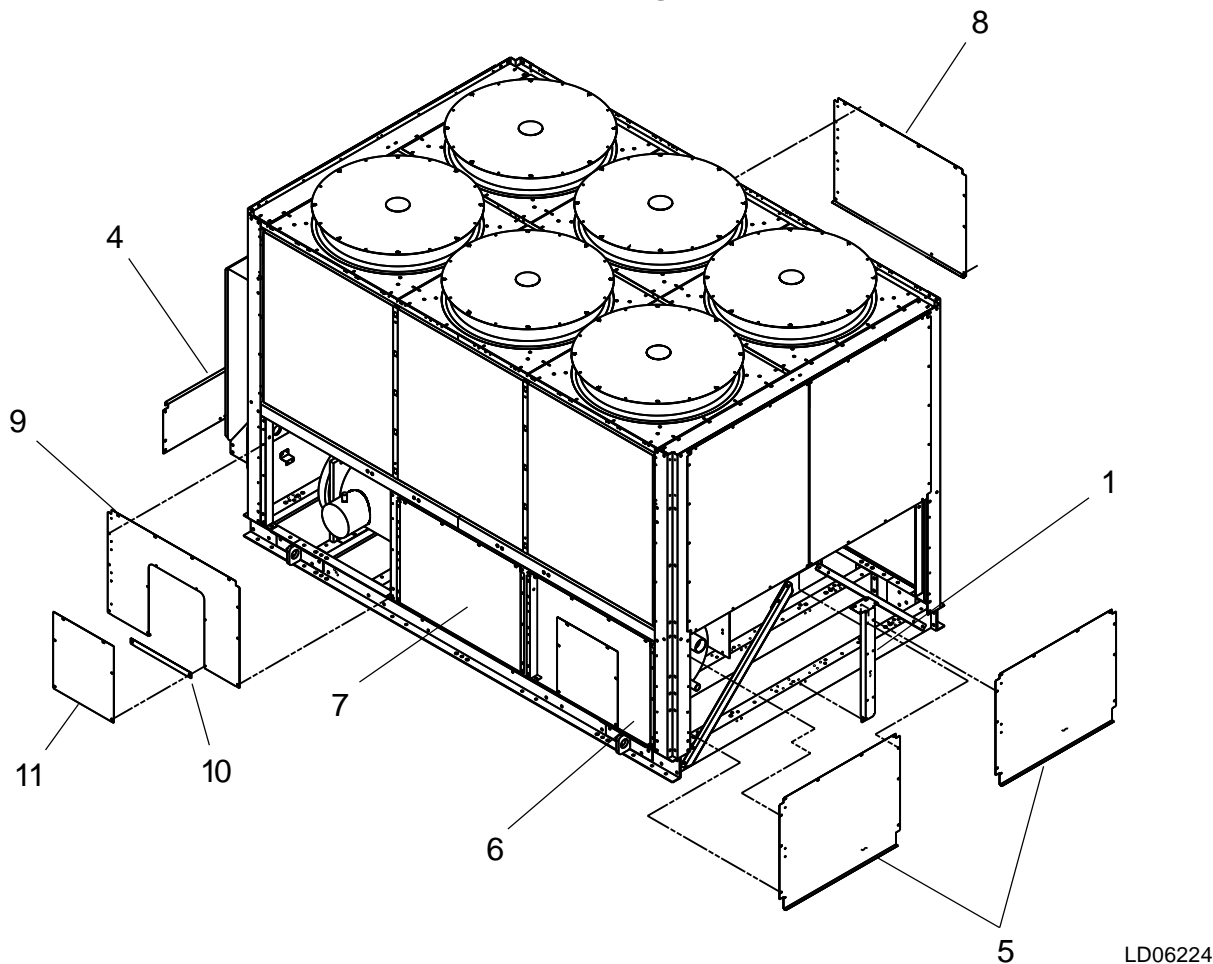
BOTTOM SECTION - LOUVERED PANEL ENCLOSURE - KIT NO. 375-29571-101 IS SHOWN.
